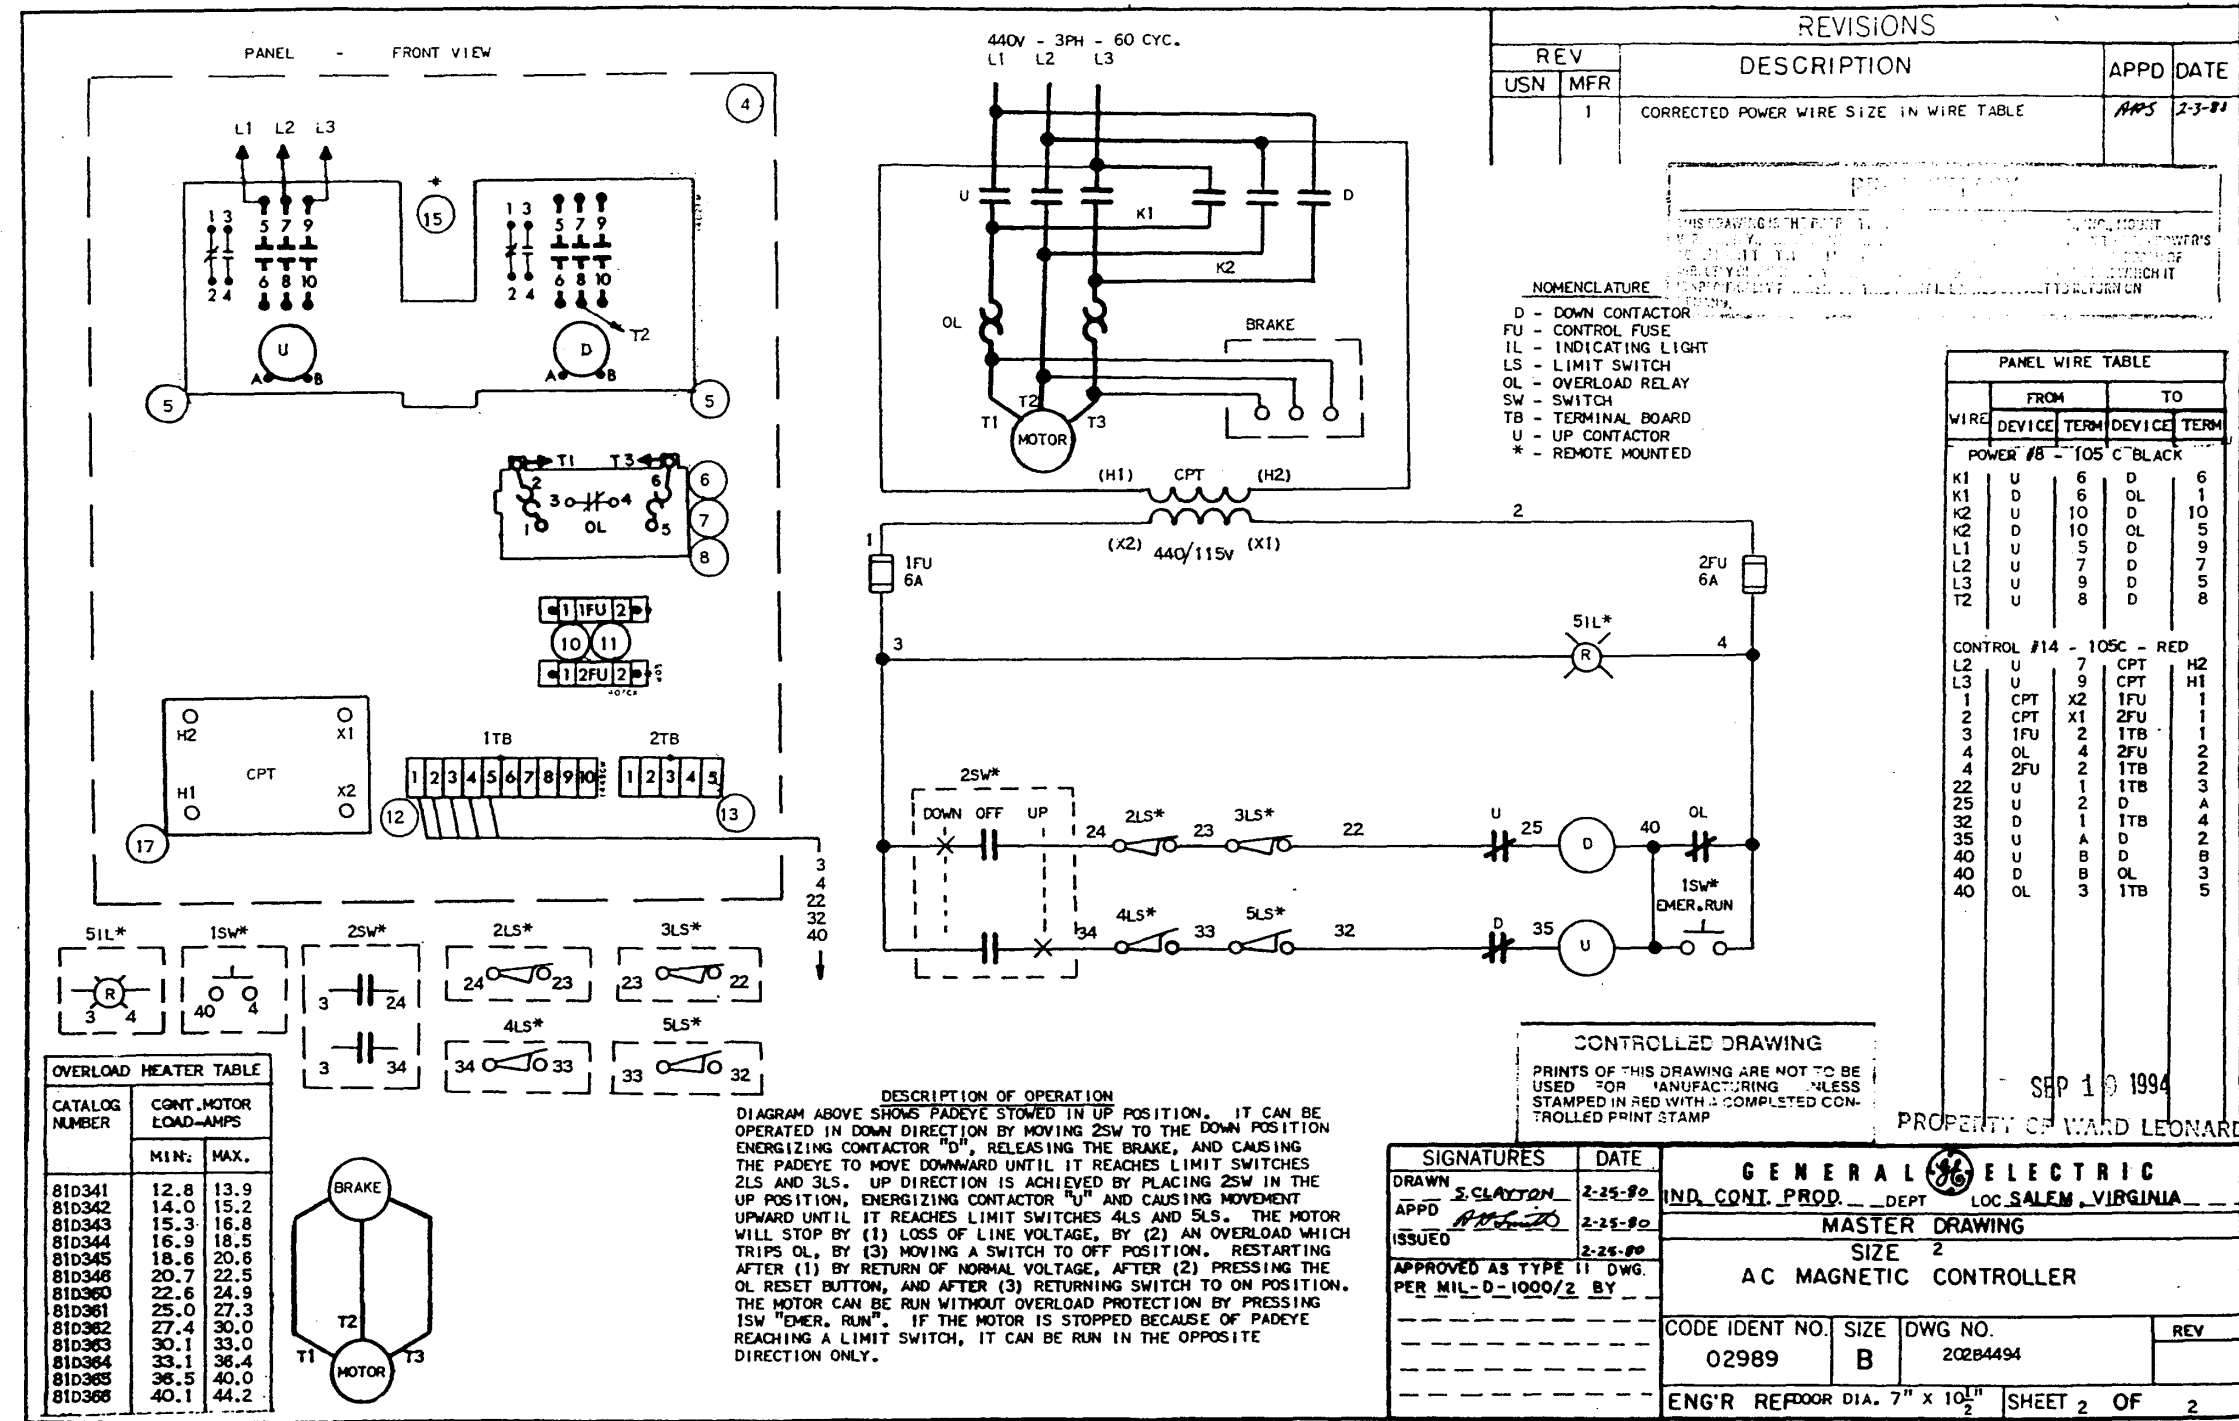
Motor Controller, Dwg. No. 202B4494 (Sheet 2 of 2)
